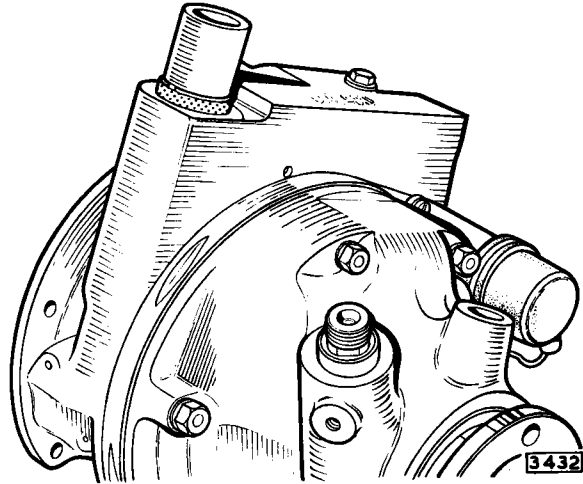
Refitting the accumulator piston using the special tool No. L.304
